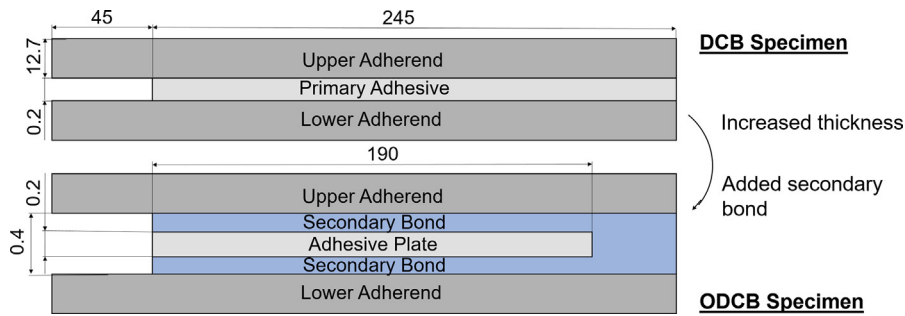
Differences between the DCB and ODCB specimens (dimensions in mm).
